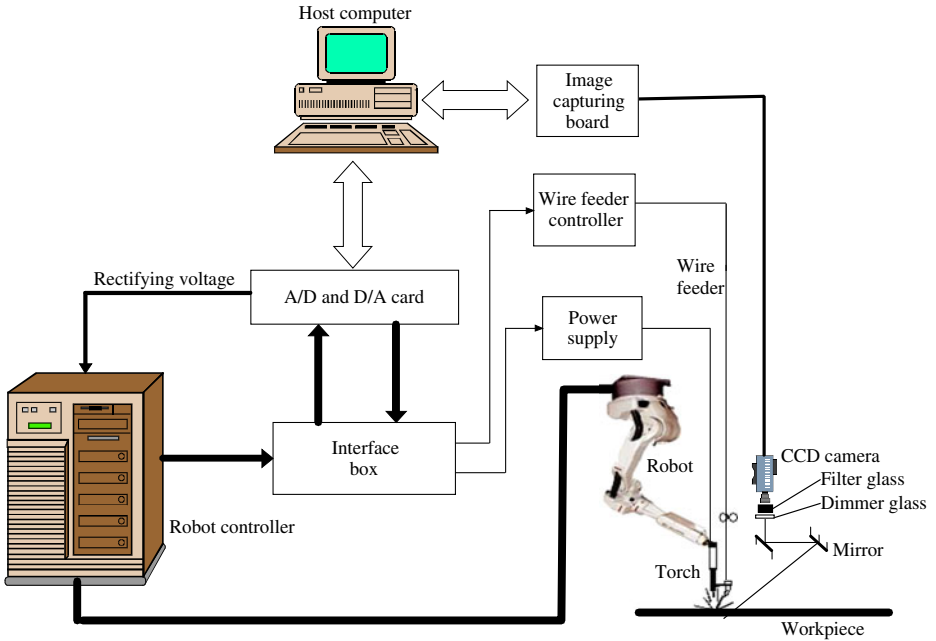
The schematic diagram of the real-time seam tracking system of welding robot with visual sensing
